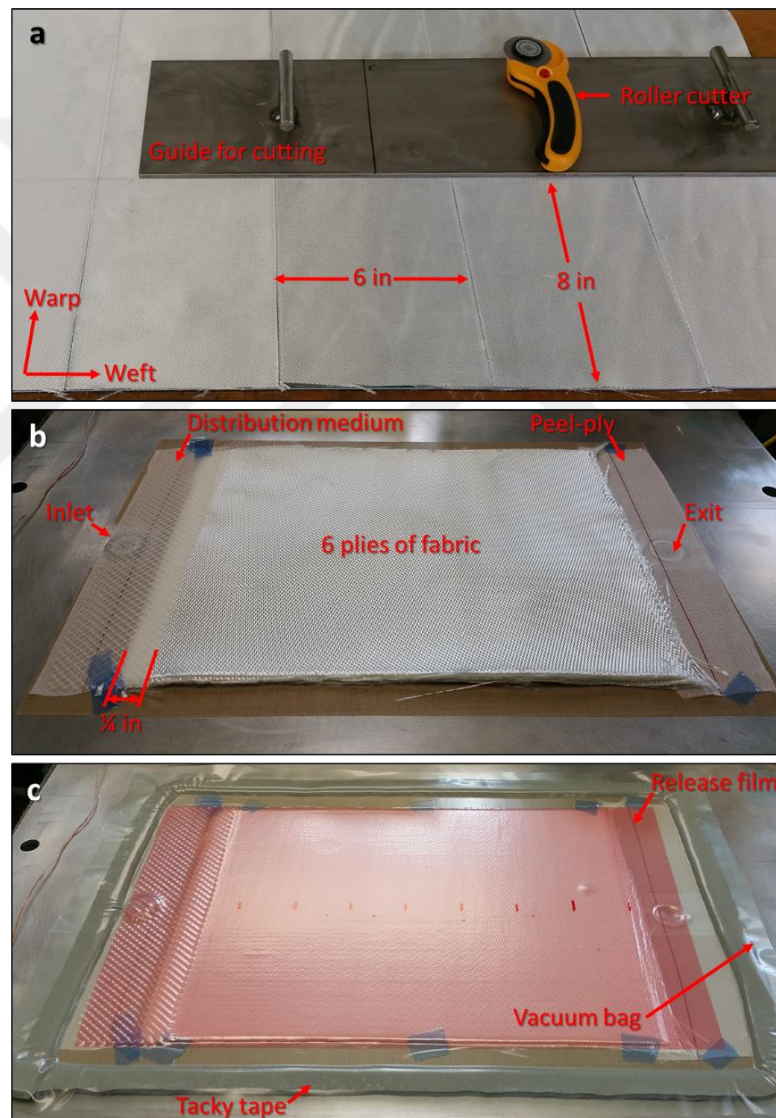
Mold preparation: (a) fabric cutting, (b) stacking and placement of fabric, and (c) vacuum bagging
